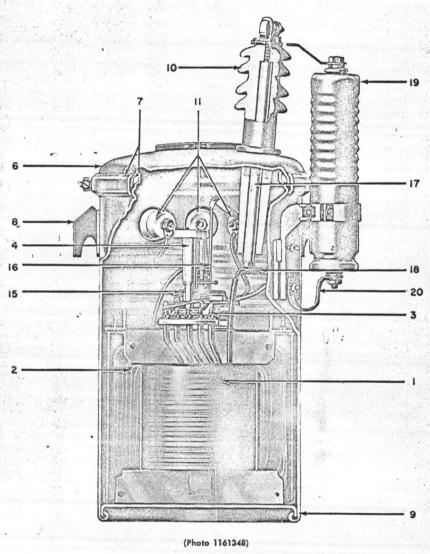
Cutaway of typical self-protected Type HSBA transformer, single bushing,
